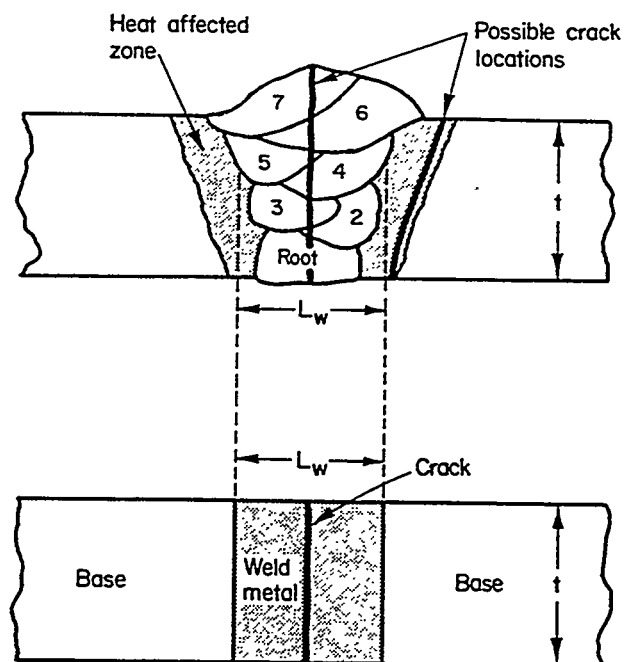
Typical girth weld sequence for a pipe and possible cracks
